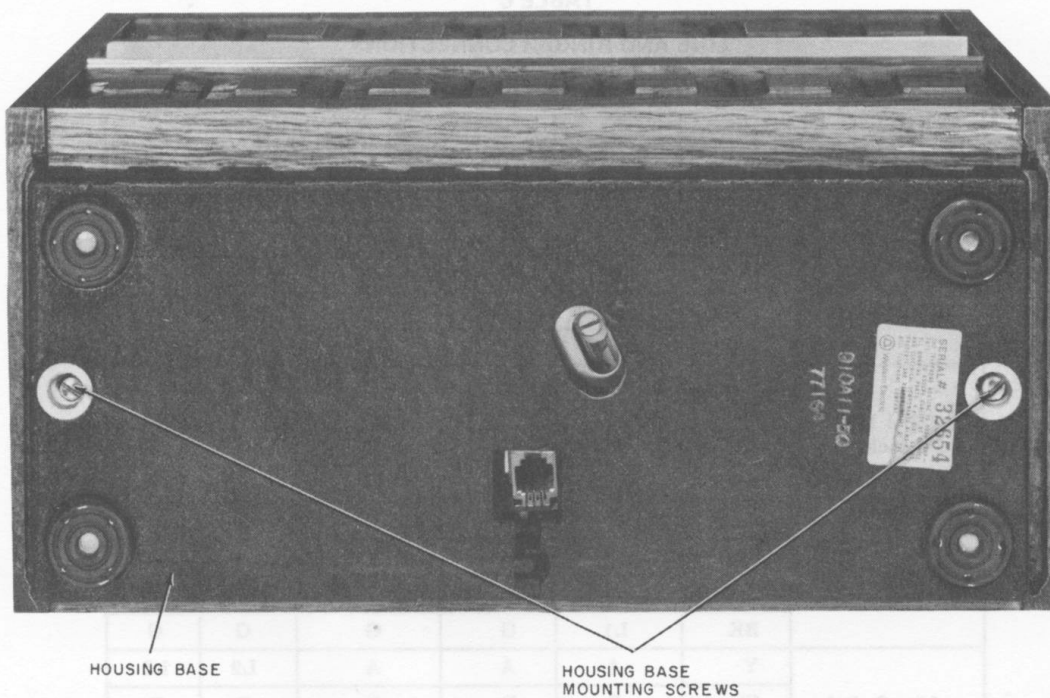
Removing Metal Housing Base (910A or 2910A Telephone Set)
